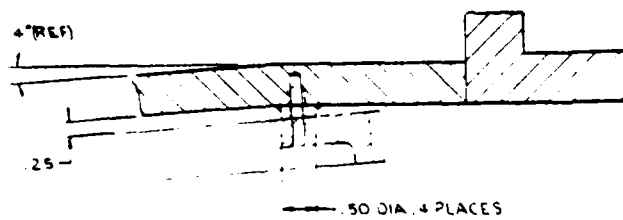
Dimensionalized Drawing of MPES Seat Structure
